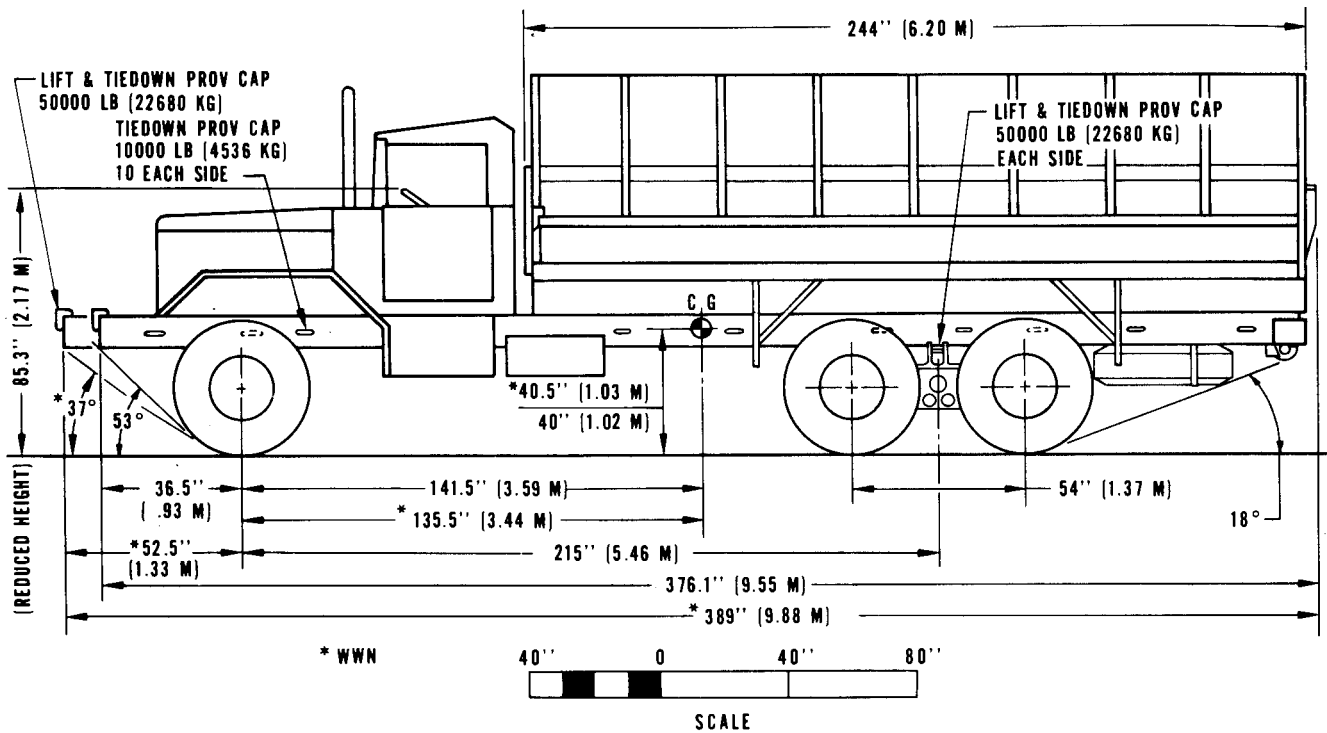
Side elevation, truck, cargo, WWN and WOWN, M55.
